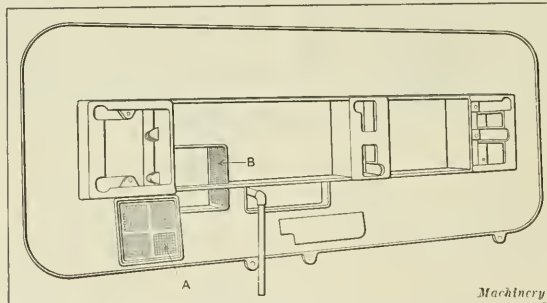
Oil Pan used on Automatic Screw Machines built by Cleveland Automatic Machine Co., showing Efficient Strainers to insure Complete Removal of Chips
